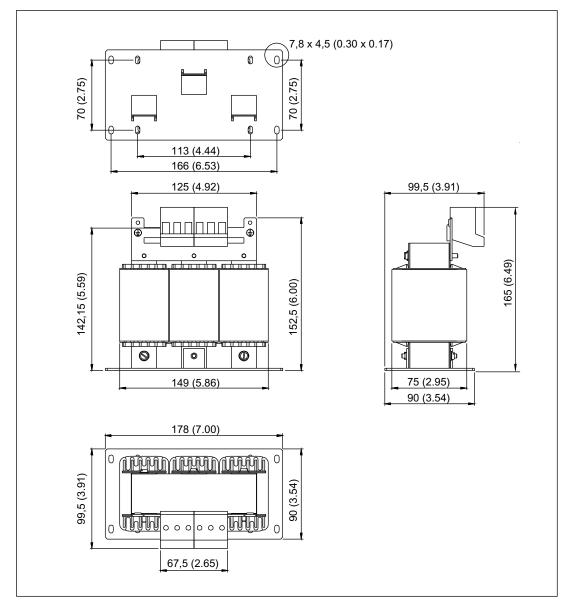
Dimension drawing of line reactor for Basic Line Module 20 kW, all dimensions in mm and (inches)
